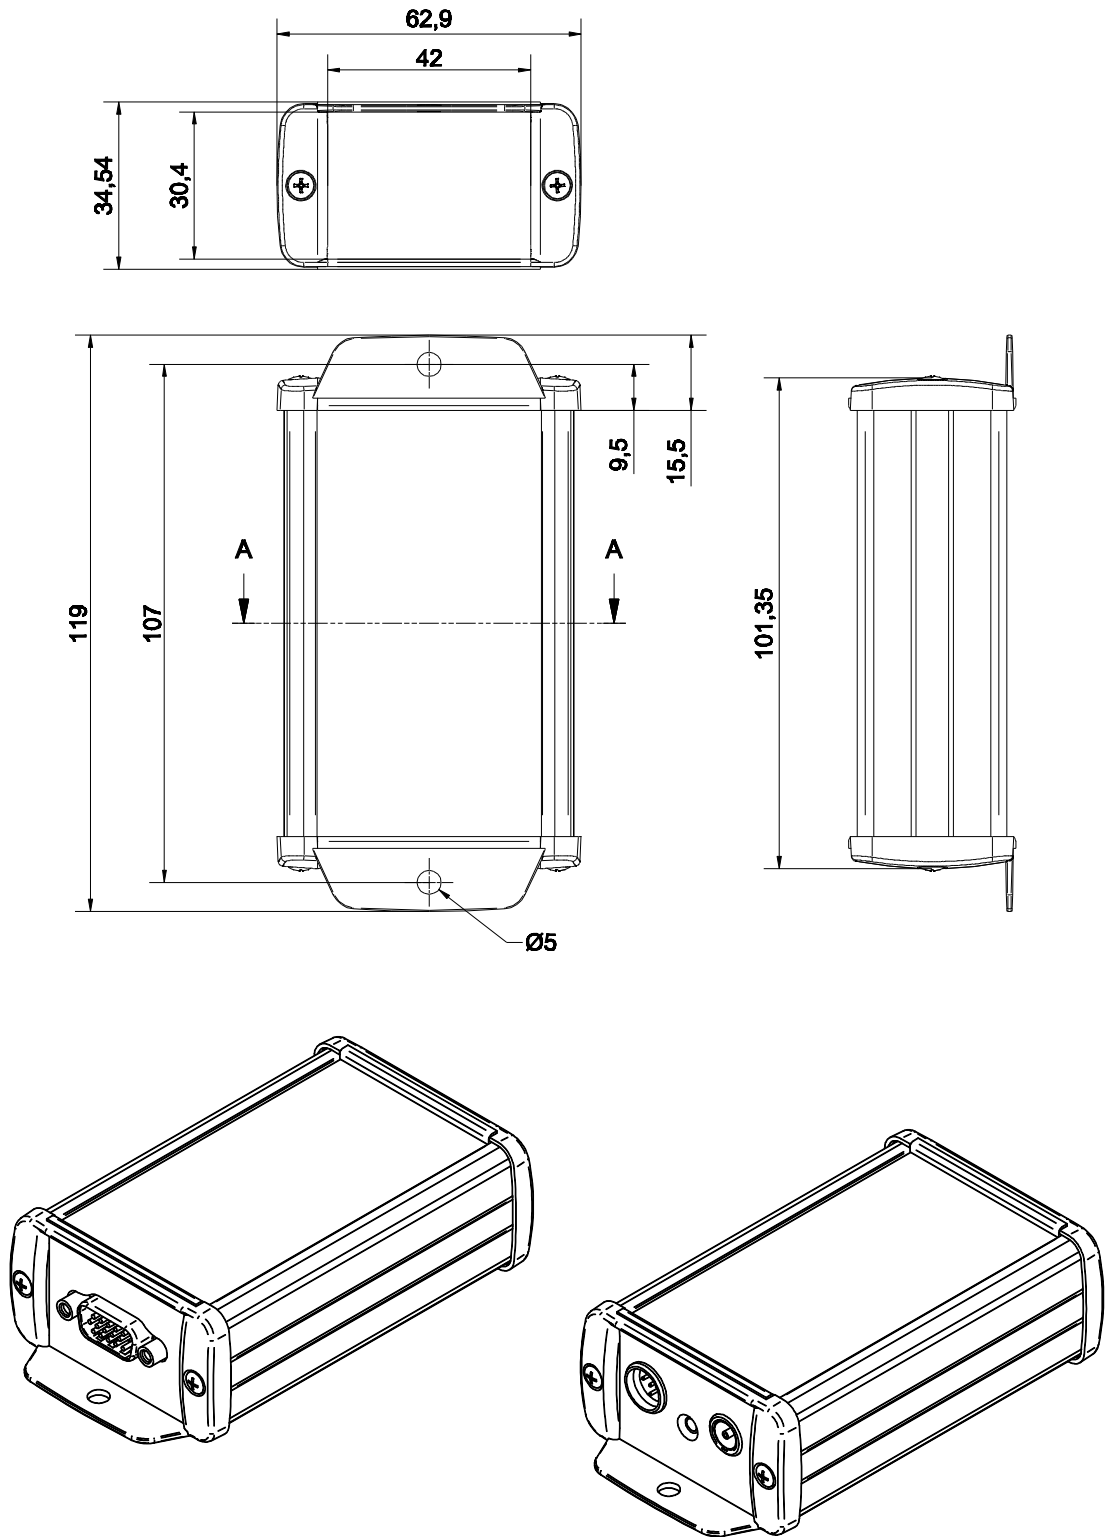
A7501PB External packaging (all dimension in mm)
